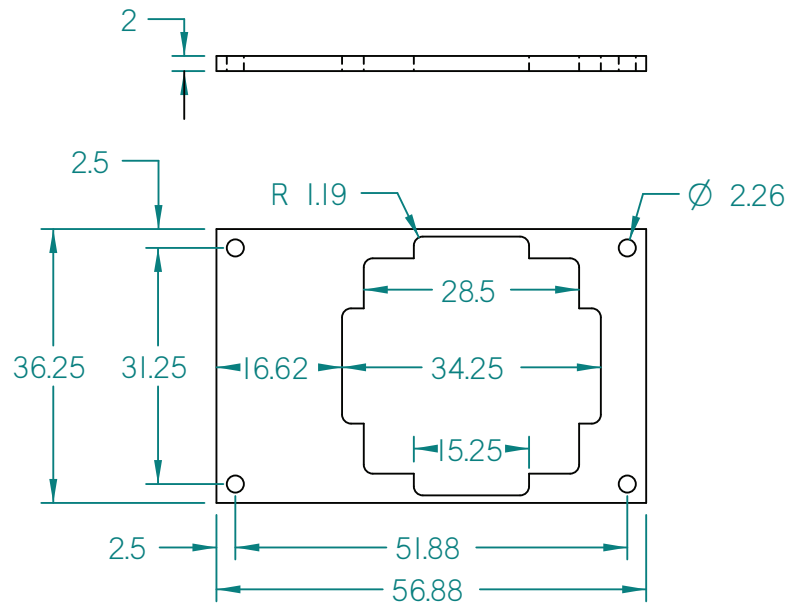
Bottom plate dimensions (mm). Material: Delrin. 1:1 scale.
